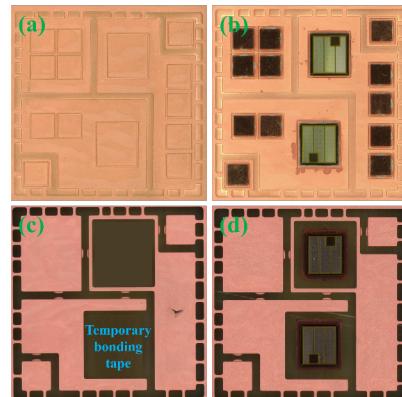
The Cu substrate of a single half-bridge package unit: (a) and (b) FOPLP\_Ag before and after die attachment; (c) and (d) FOPLP\_Cu before and after die attachment;
